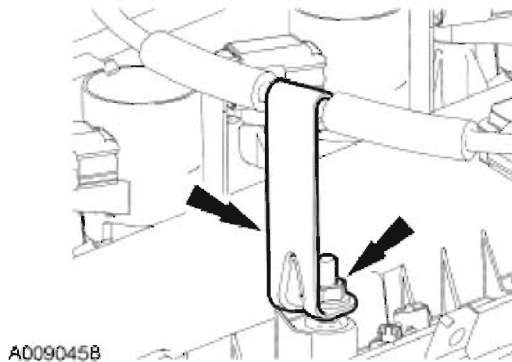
Locating Power Steering Tube, Bracket & Nut
